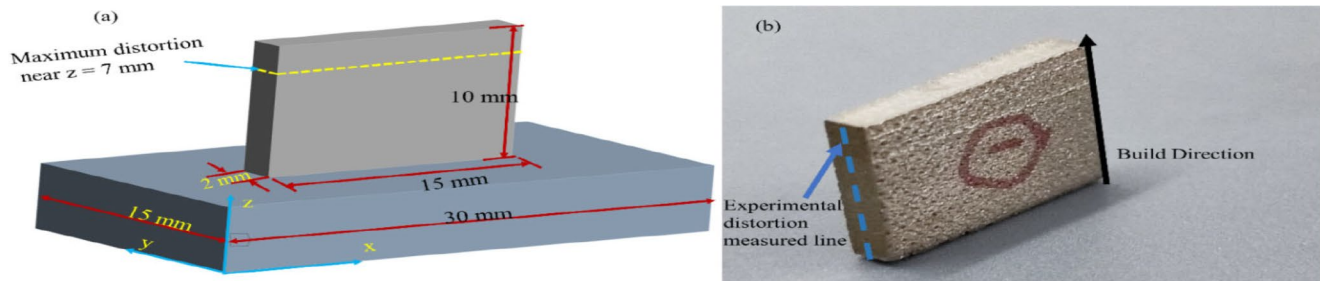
(a) Rectangular block dimension; (b) L-PBF fabricated parts
